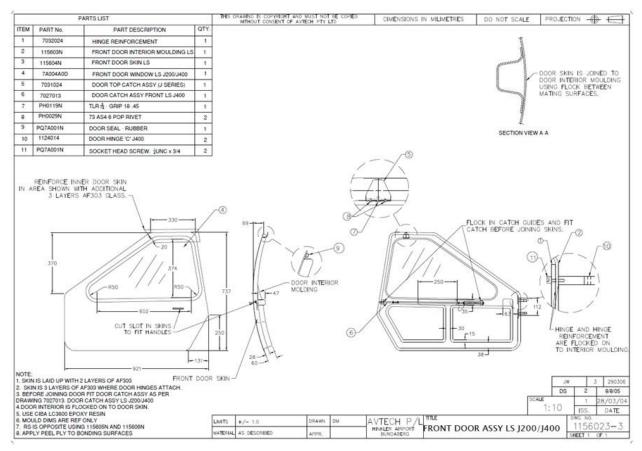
J200-Type Front Door Assembly (J200/J400)
